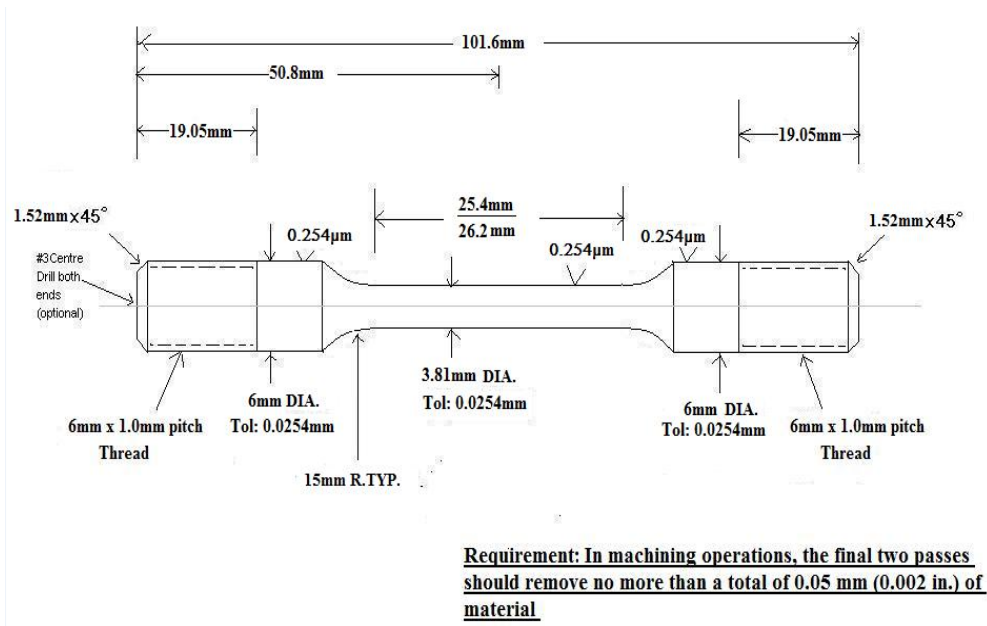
Dimensions of specimens for constant load SSC and SSRT tests.
